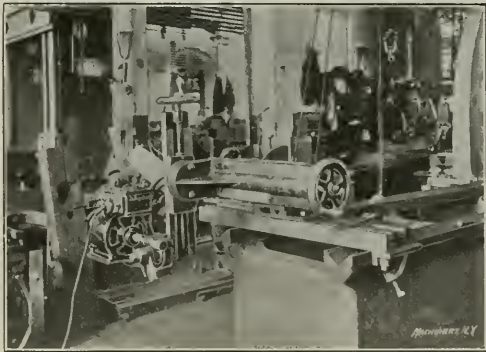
Motor-driven Portable Milling Attachment for Finishing the Ends of the Ways.
